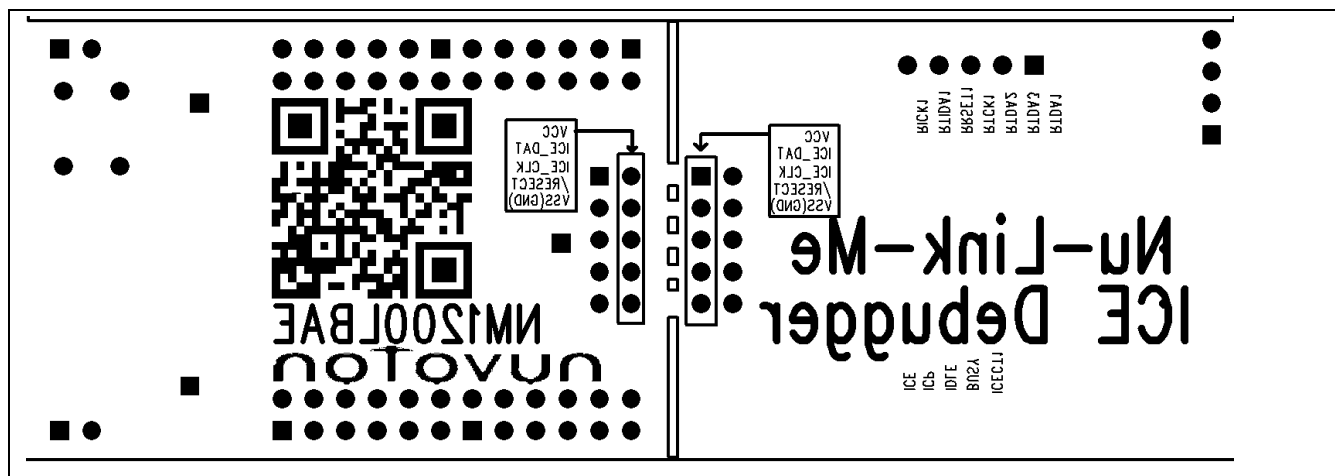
NuTiny-EVB-NM1200 PCB Placement
